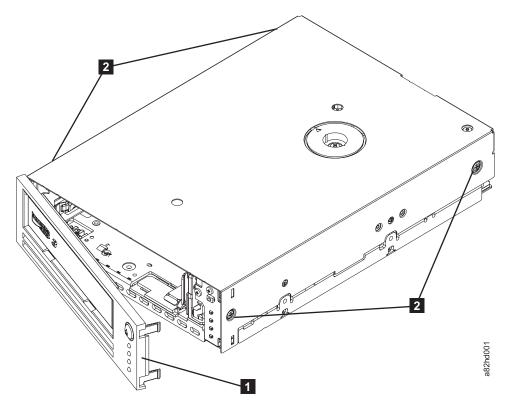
Removing the bezel and the cover from the 2U internal drive
